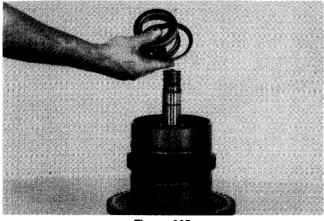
Remove piston return spring and retainers. NOTE: Modulated forward and reverse clutches will have piston return disc springs. (See note on page 15, Figure 83.)
